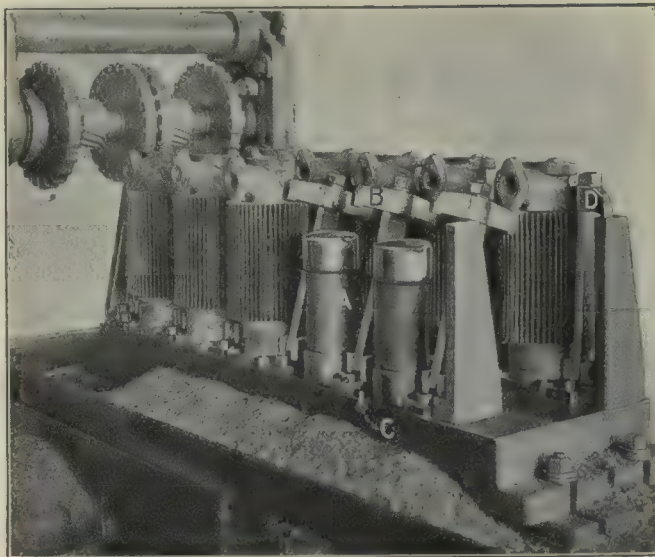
MILLING INLET AND EXHAUST OUTLETS
